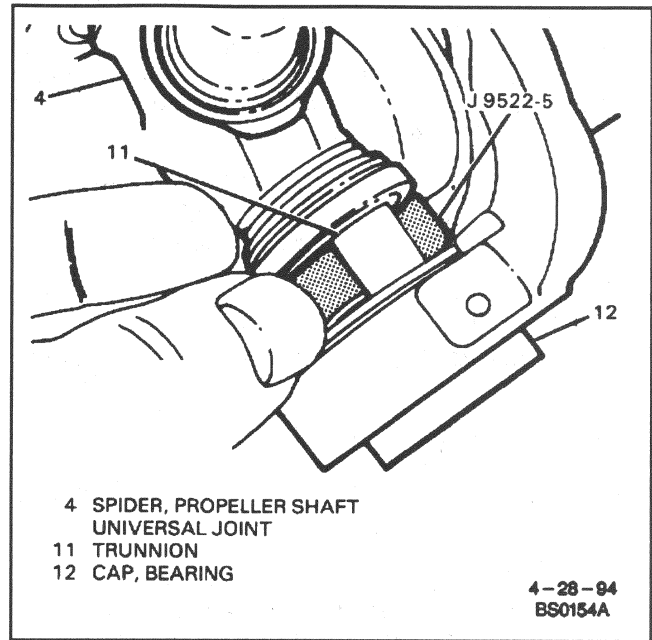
Installing Universal Joint Bearing Spacer Remover
